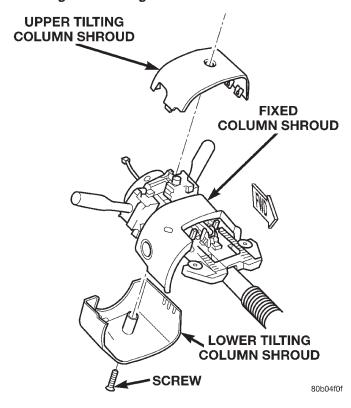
Steering Column Shrouds Remove/Install INSTALLATION
